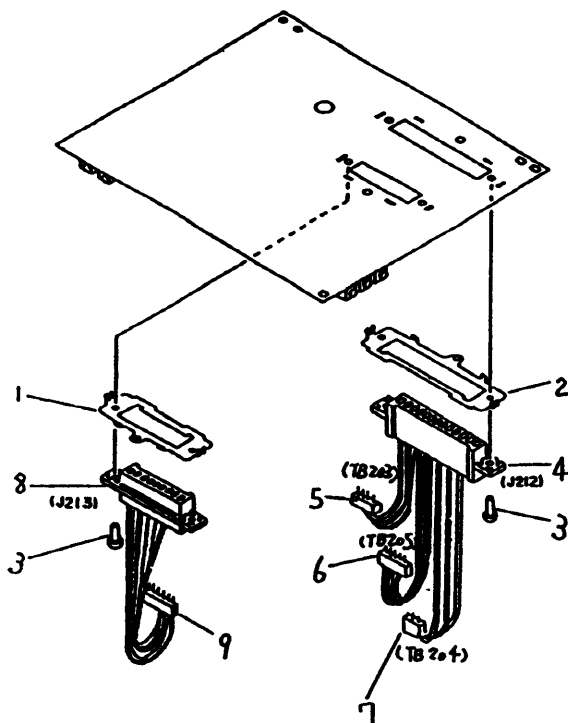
A: DC Controller P.C.B. Assembly (RG1-2706-050)
